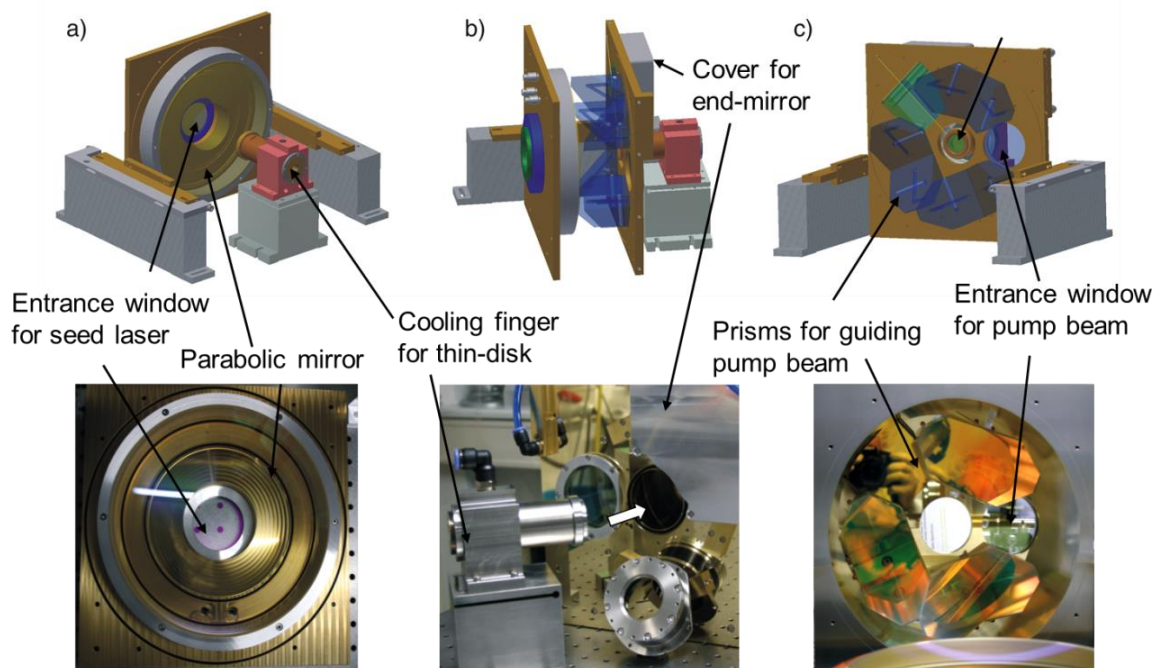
Drawings (top row) of the gas-tight pump-head and photographs of the manufactured pieces (bottom row).
